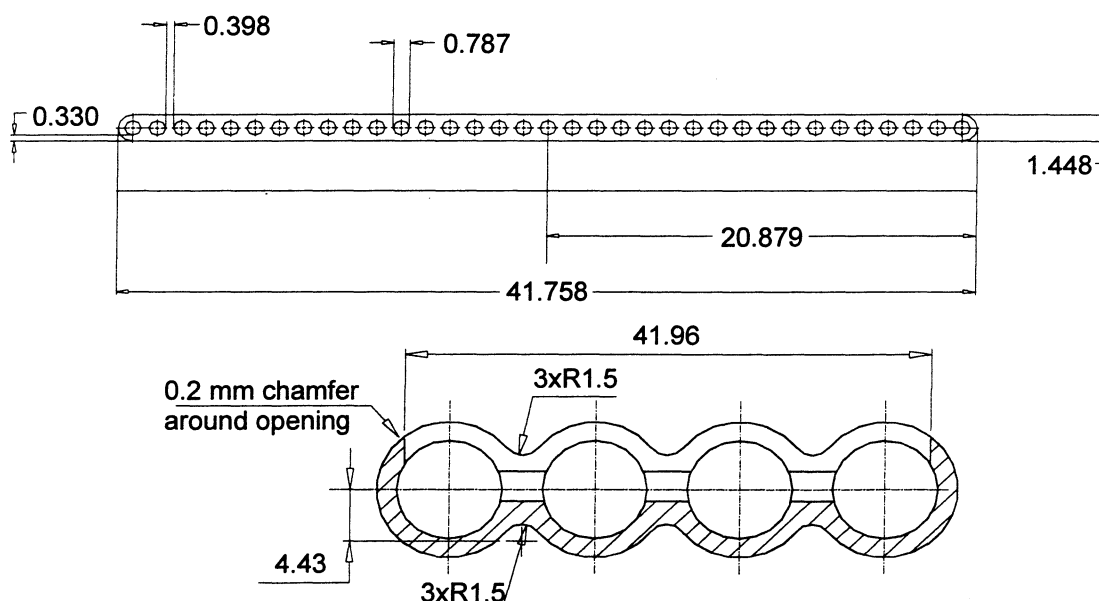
Profile of evaporator microchannel tube (top) and manifold (bottom). All dimensions in mm.
